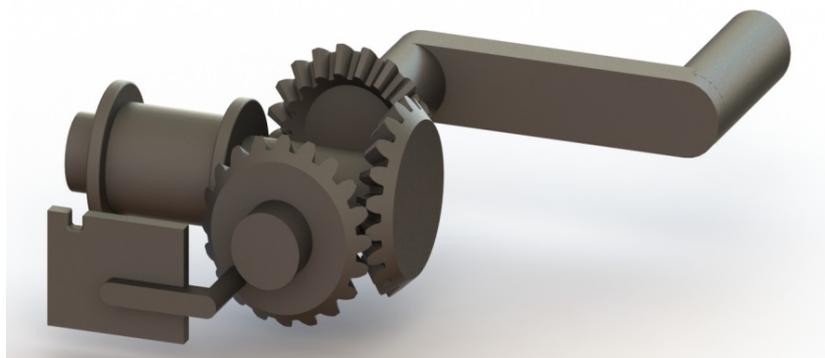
A rendered CAD drawing of the coiled cable mechanism.
